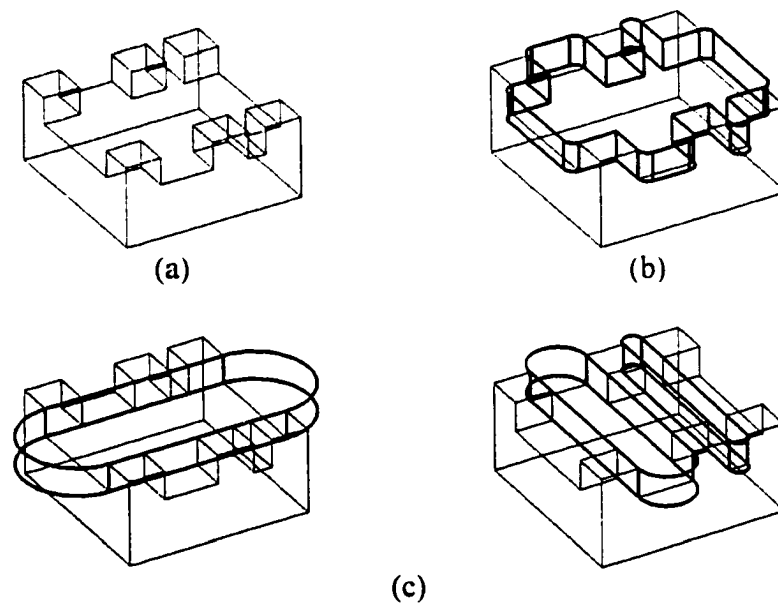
Which features are better? Cylindrical faces are intended to denote cutter sizes: (a) part; (b) one pocket feature; (c) two slot features.
